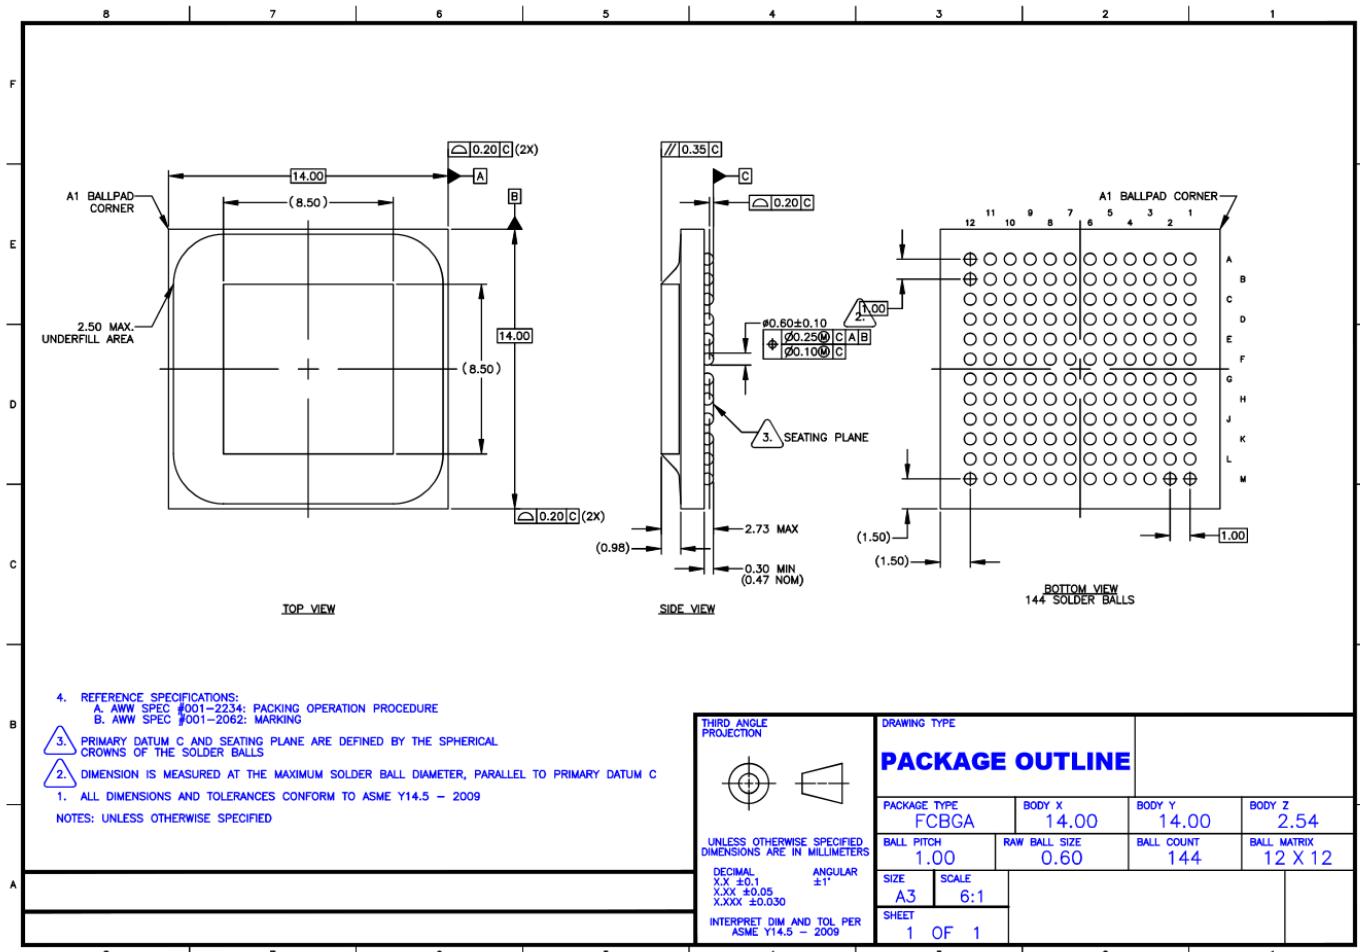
PACKAGE OUTLINE DRAWING FCBGA
